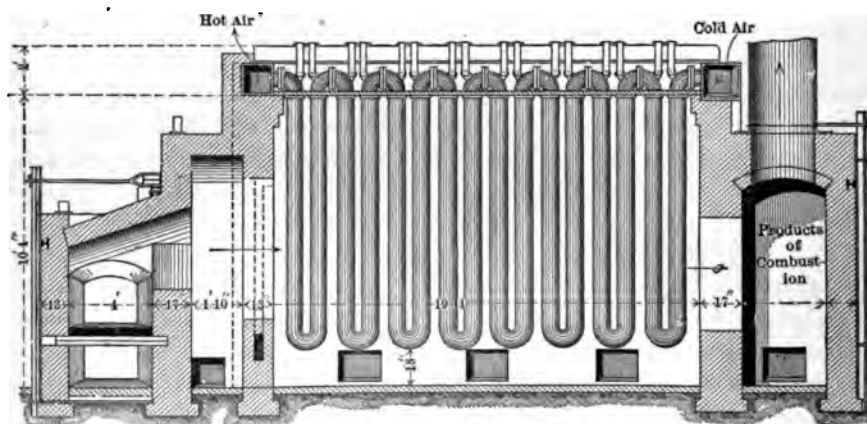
HOT BLAST STOVE, SIDE VIEW OF U PIPES.
